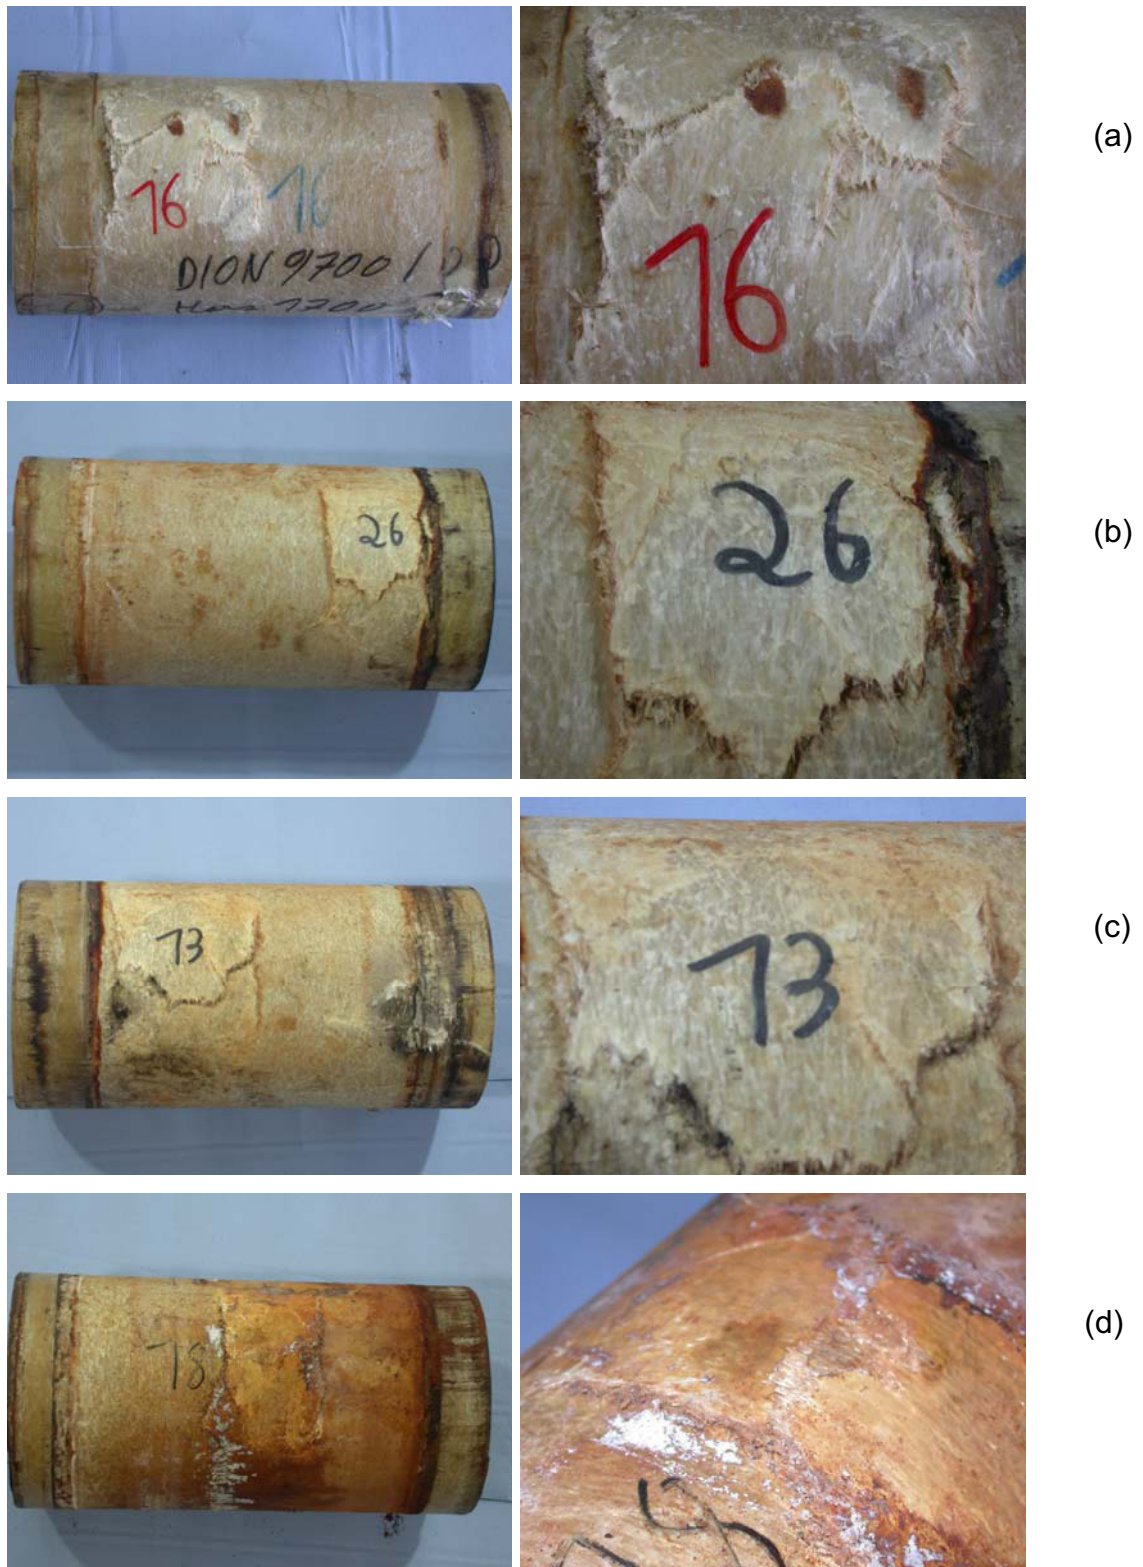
Pictures of fracture pattern from internal pressure test specimens. On the left side a macroscopic and on the right side a detailed picture is shown. Time until failure [h]: (a) 73.3, (b) 84.5, (c) 285.4, (d) 385.6
